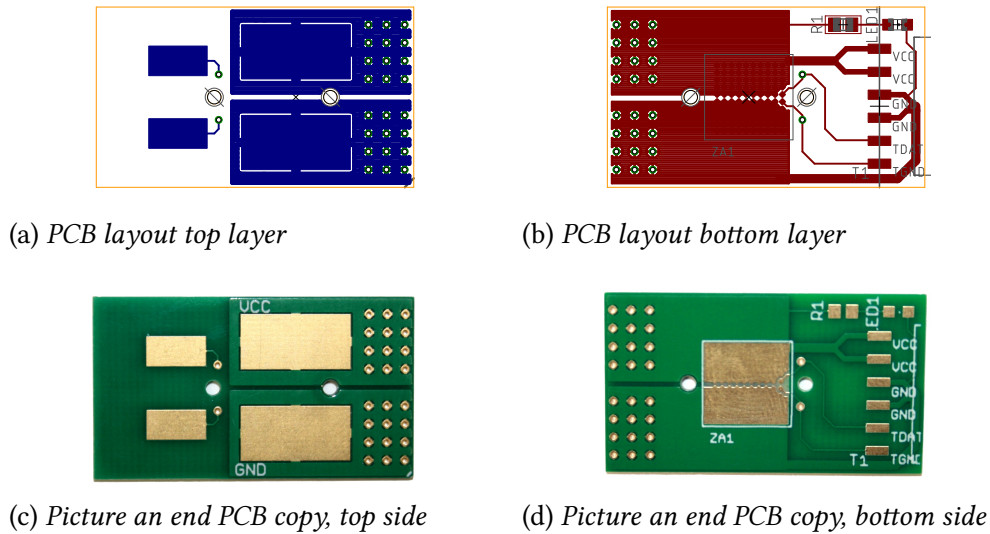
End PCB for the heatable strip prototypes. The dimensions are 35 mm  $\times$  19.90 mm.
